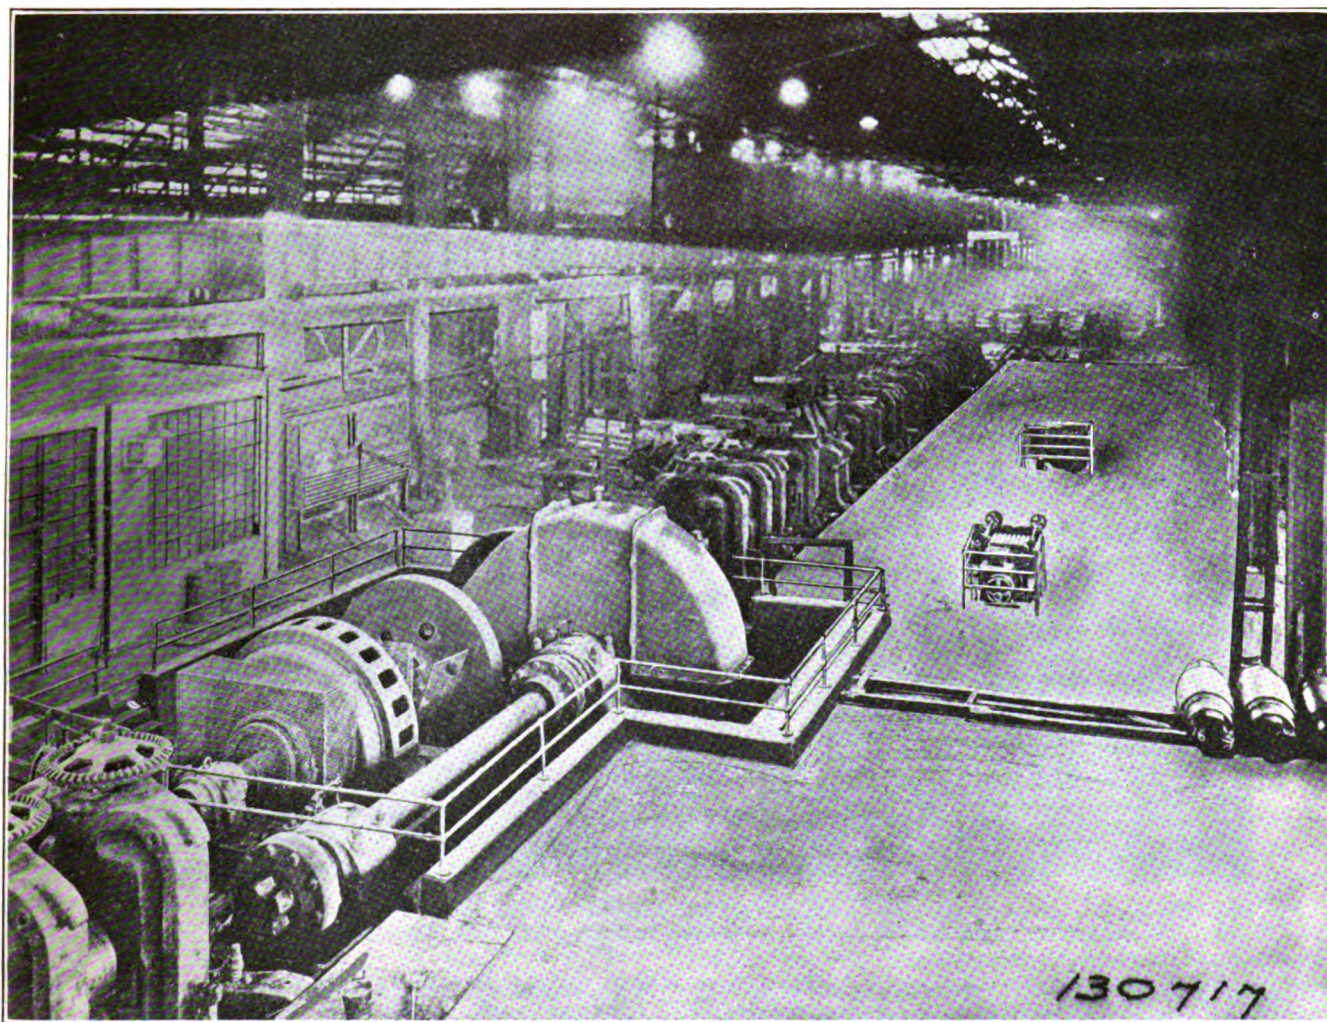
A view of the sheet mill layout, showing prominently the main motor drive, reduction gear and flexible coupling.
